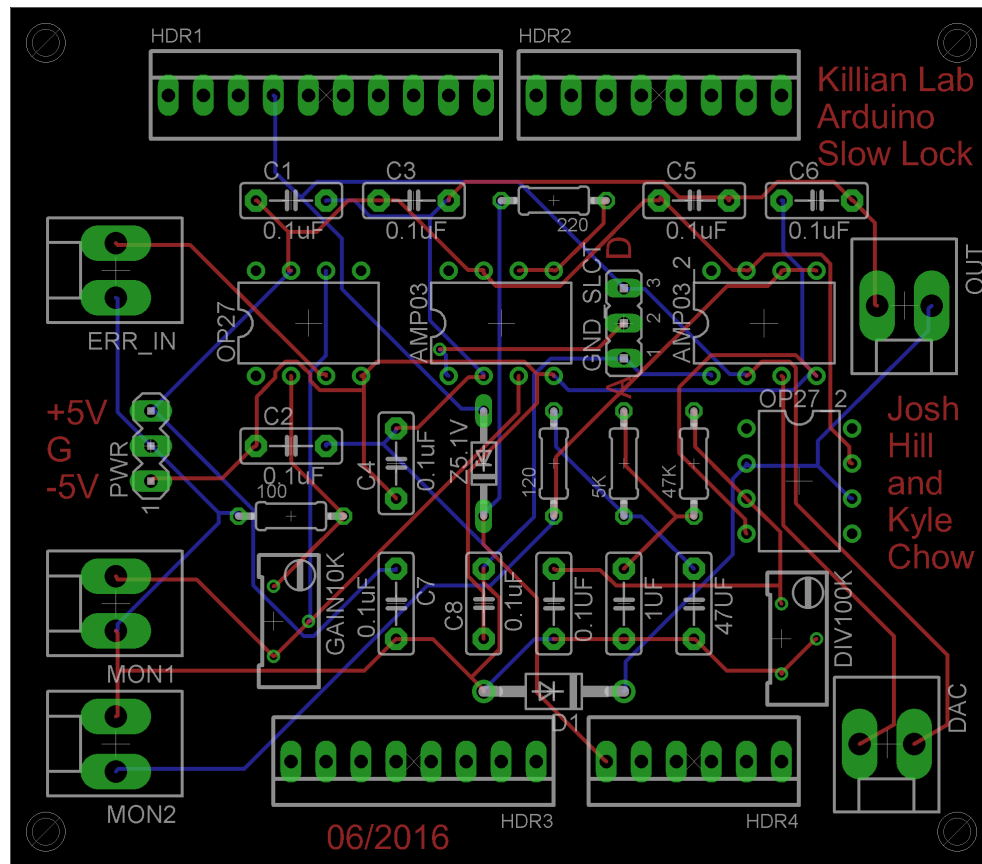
Physical layout of traces and components on the printed circuit board (PCB). Extra solder pads and through-holes are included for bringing wires into and out of the board from BNC cables.
